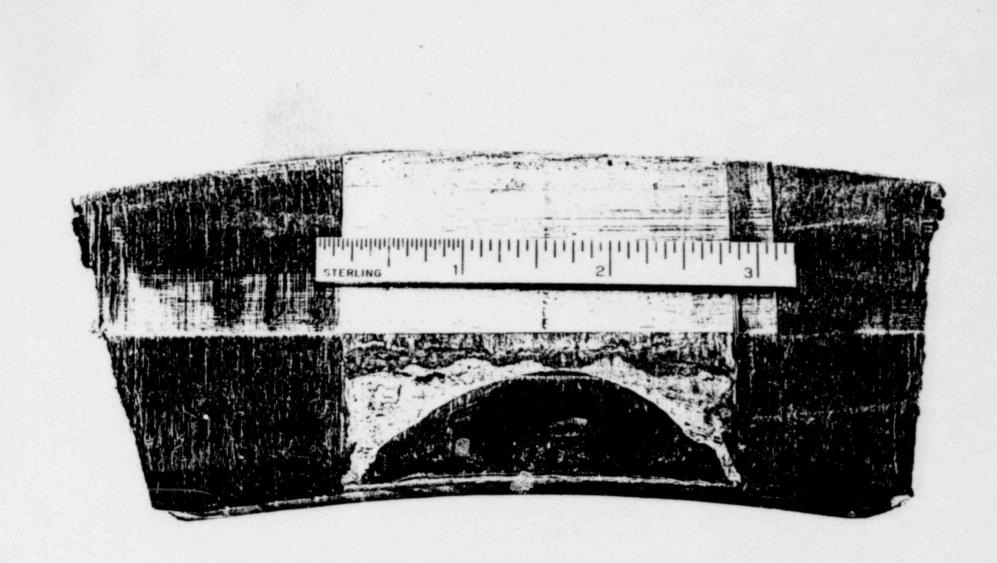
Thermal Fatigue Crack; 6.75 Inch Deep, 2.5 Inch Long, in a Welded Cast Stainless Steel Pipe Sample.
